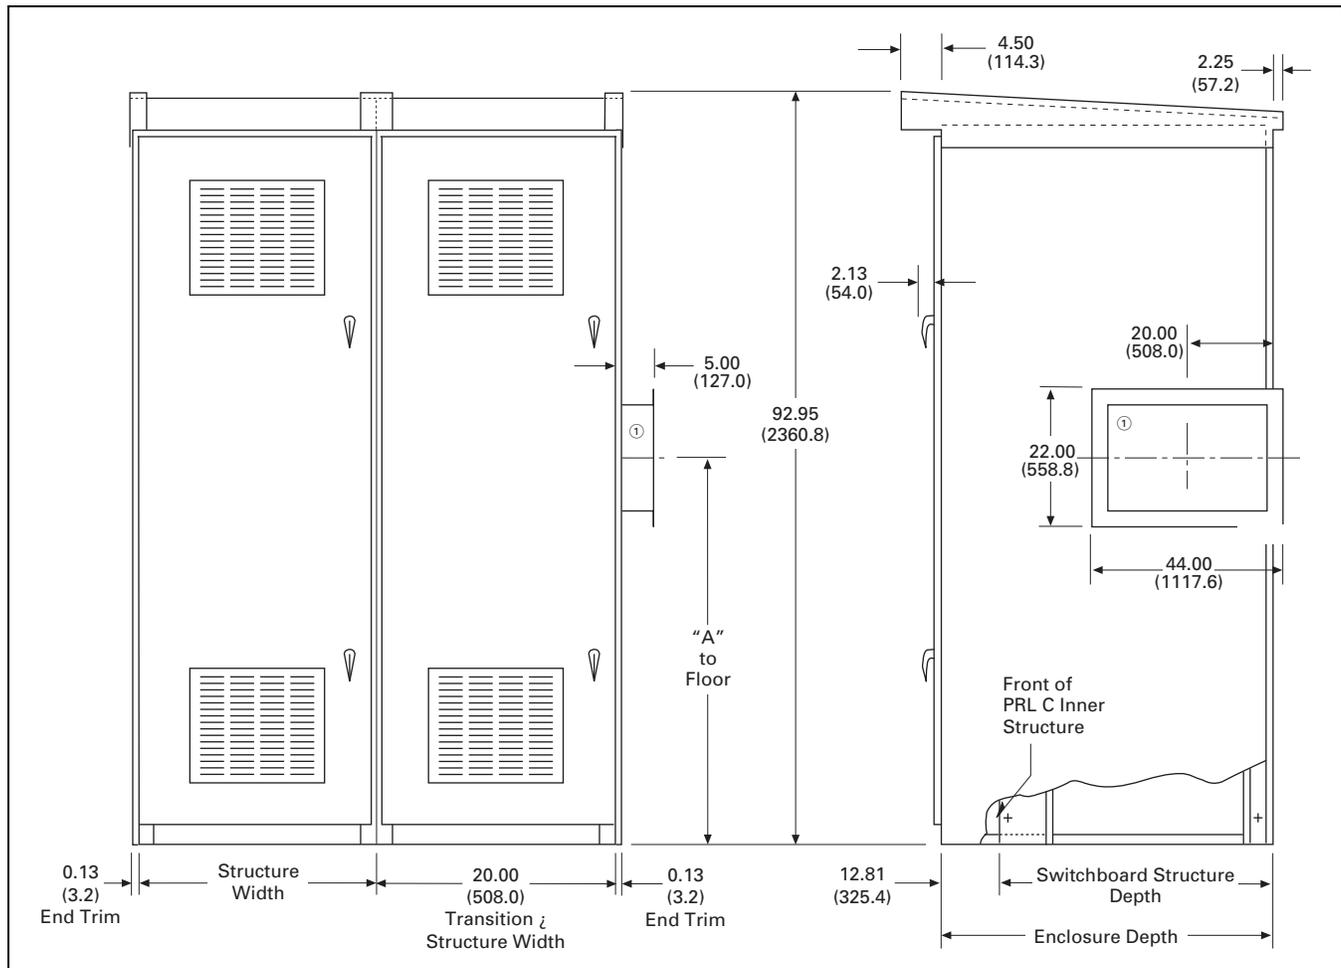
Front-Access—Non-Walk-In with Sloped Roof—Dimensions in Inches (mm)
